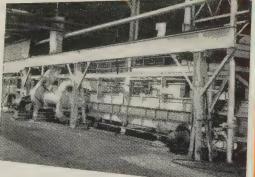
Hydraulic bucket contouring machine—it's built for future shapes
